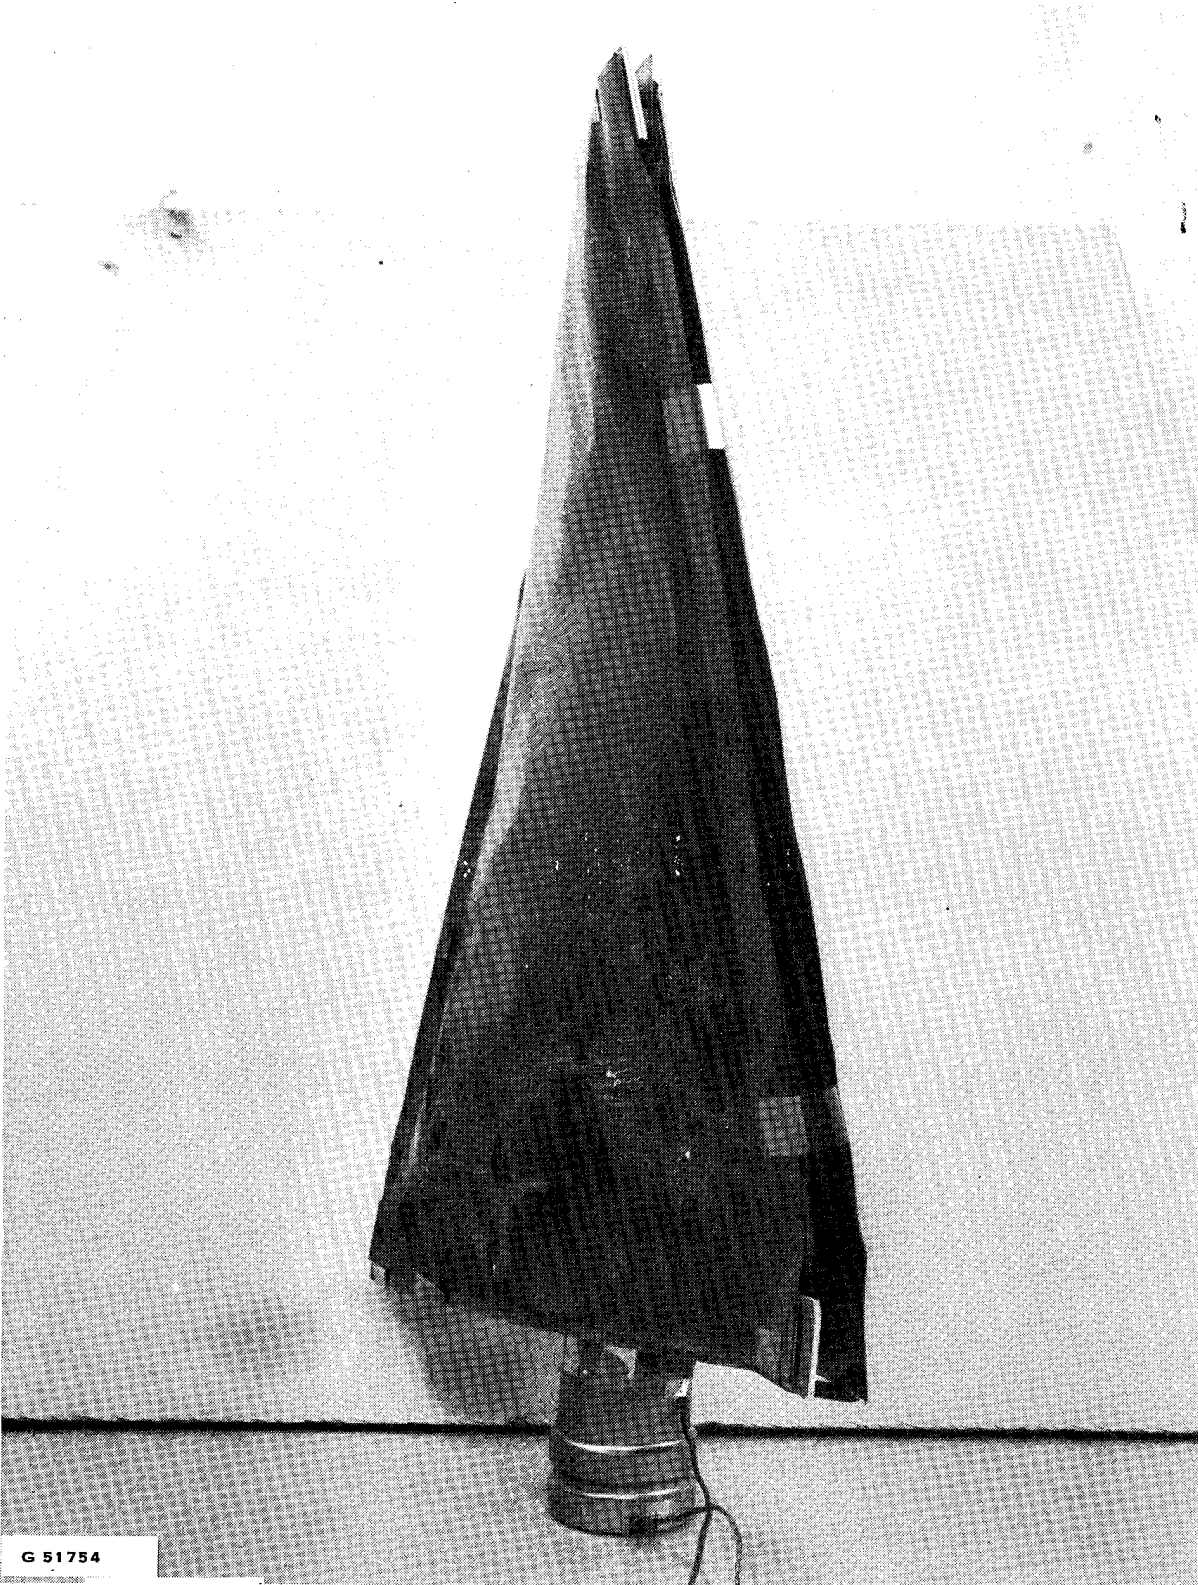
ASSEMBLY OF DEMONSTRATION PRESSING DETAIL PARTS
